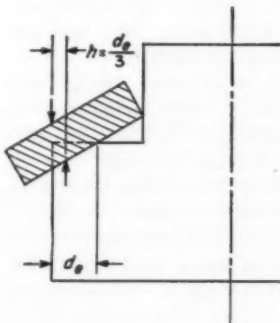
Section profile of dished-out retaining ring on deflected shoulder or groove wall.
